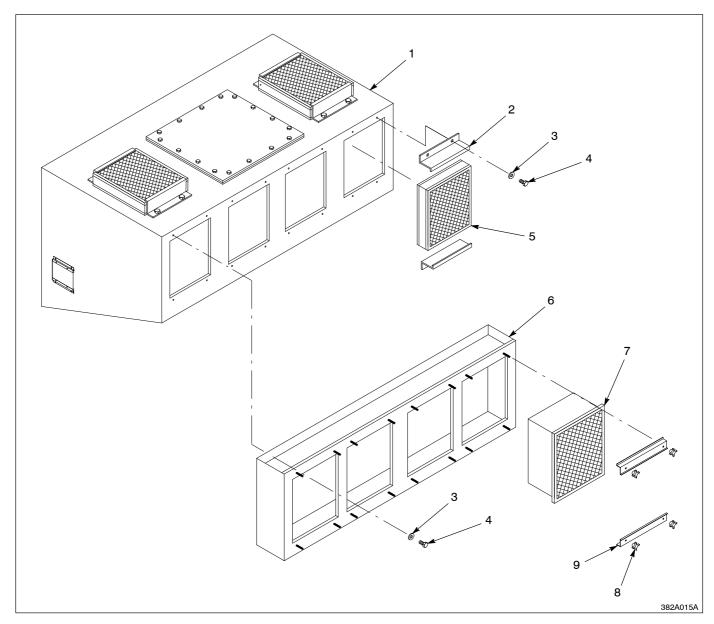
Installing front-mounted final filter kits (512/518 shown)
